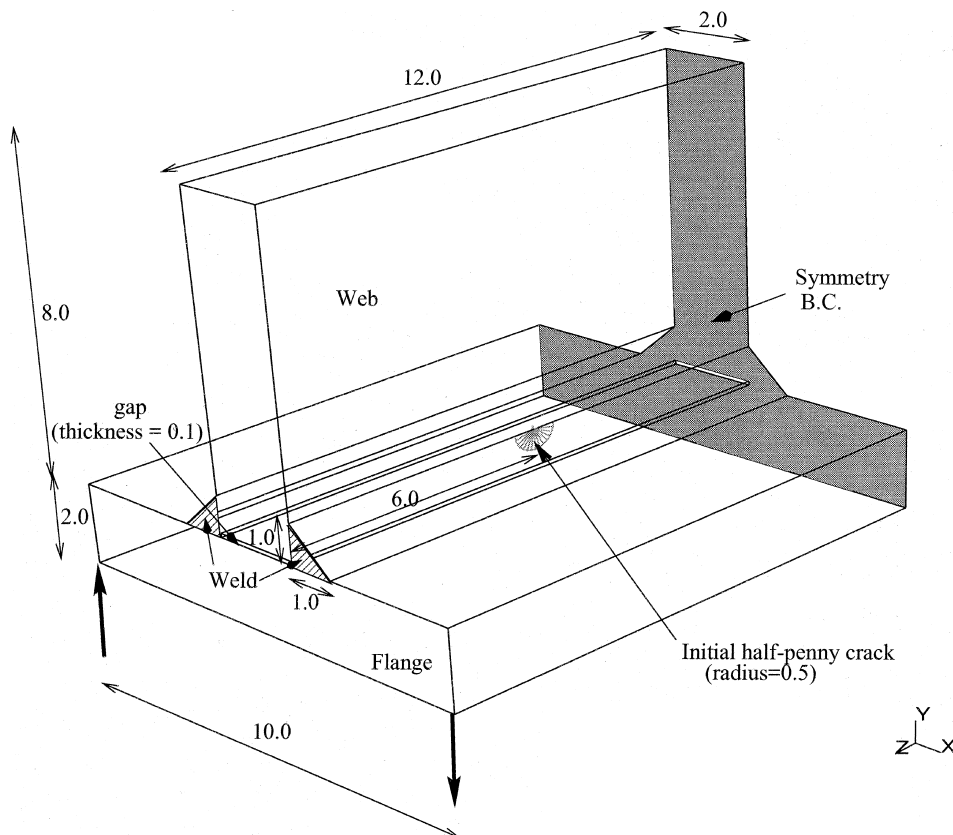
Welded T-section beam with a crack. The initial crack surface is represented using 14 flat triangles. The representation of the outer skin of the body is also shown. The crack surface and the outer skin of the body are used by the geometric engine as described in Section 5.
